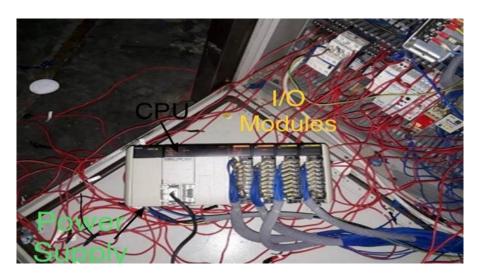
New control system (N.C.S) of Cap seal assembling machine
